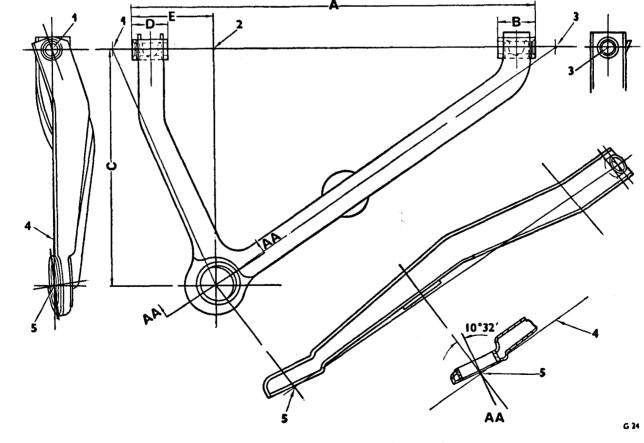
CHECKING DIMENSIONS-UPPER TRIANGLE LEVERS
